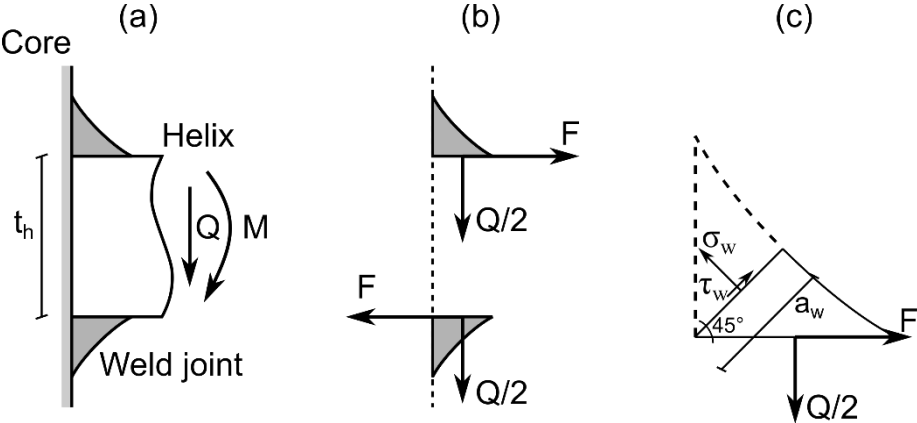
Loading of the weld joint (a) Bending moment M and shear load Q that must be transferred to the core (b) Loads acting on the weld joints (c) Stress state along the upper weld throat a_w
